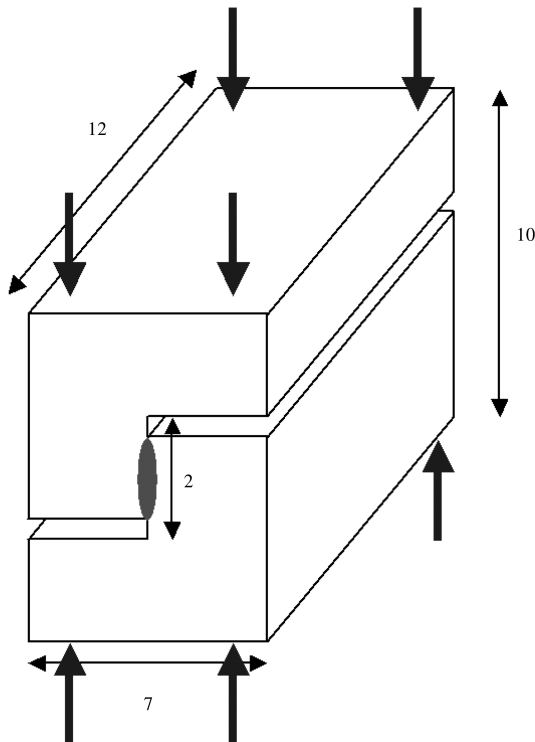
Shear strength test specimen geometry (all dimensions in millimeters).
